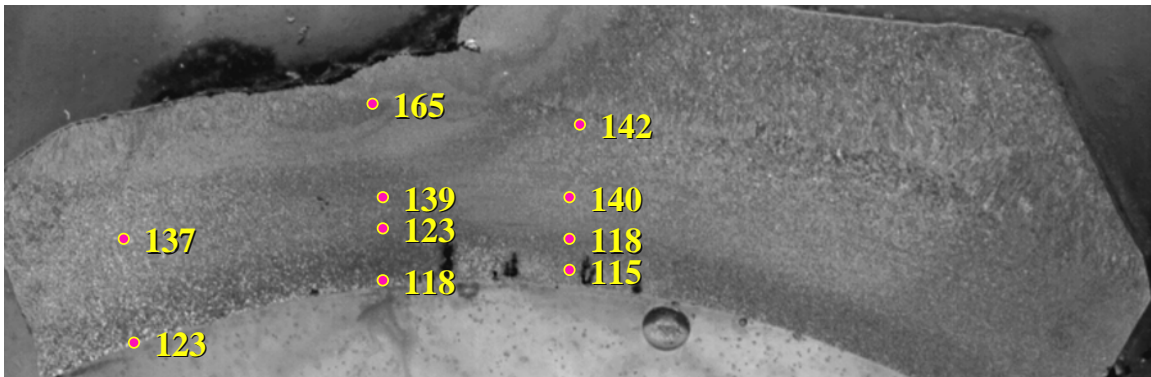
Micrograph of an etched section of tube #3 showing a SAC crack on the inner surface under the longitudinal attachment weld.
